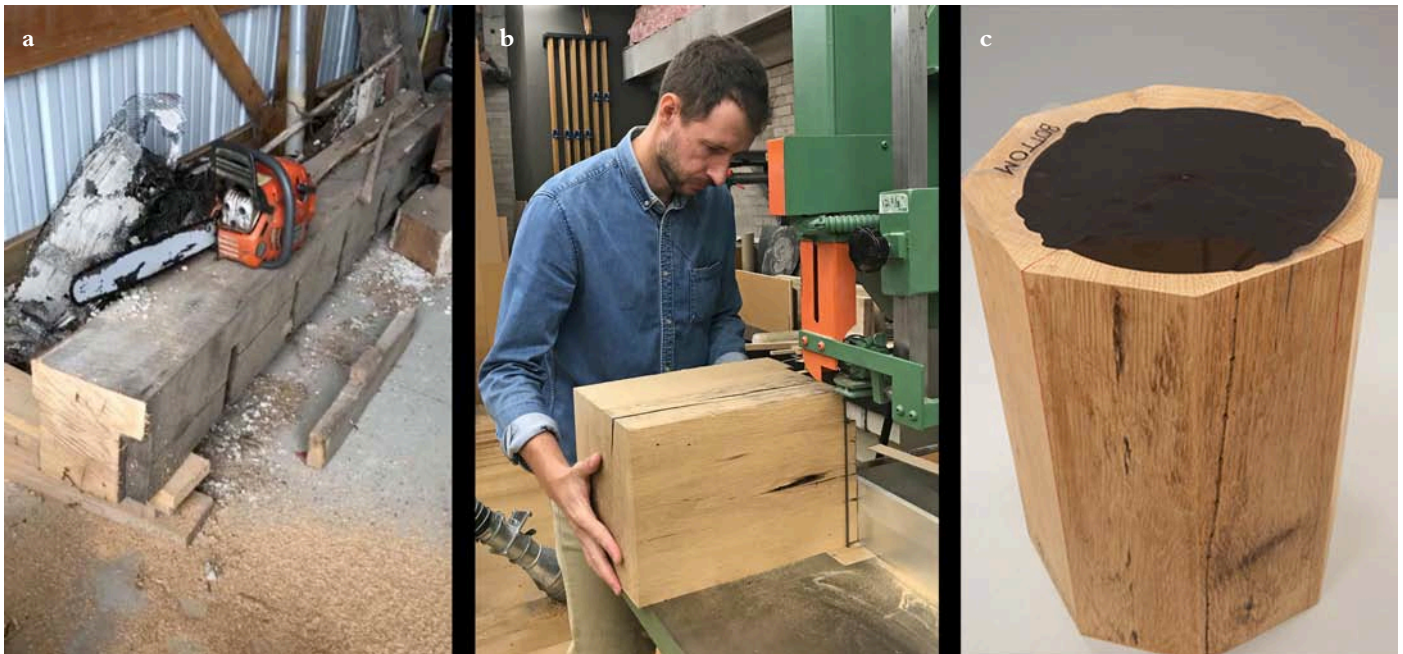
a. Church balcony beam in Jeff Schrier's workshop; b. Ivo Kipre cutting the beam section into a perfectly squared-off block; c. The largest cross- and longitudinal sections from the 3D model were printed in a 1:1 scale on transparent Mylar to plot the finial in the octagonal-shaped block. (© The Metropolitan Museum of Art)
